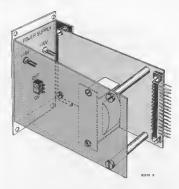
For safety reasons, the transformer is best mounted on a separate piece of aluminium.
